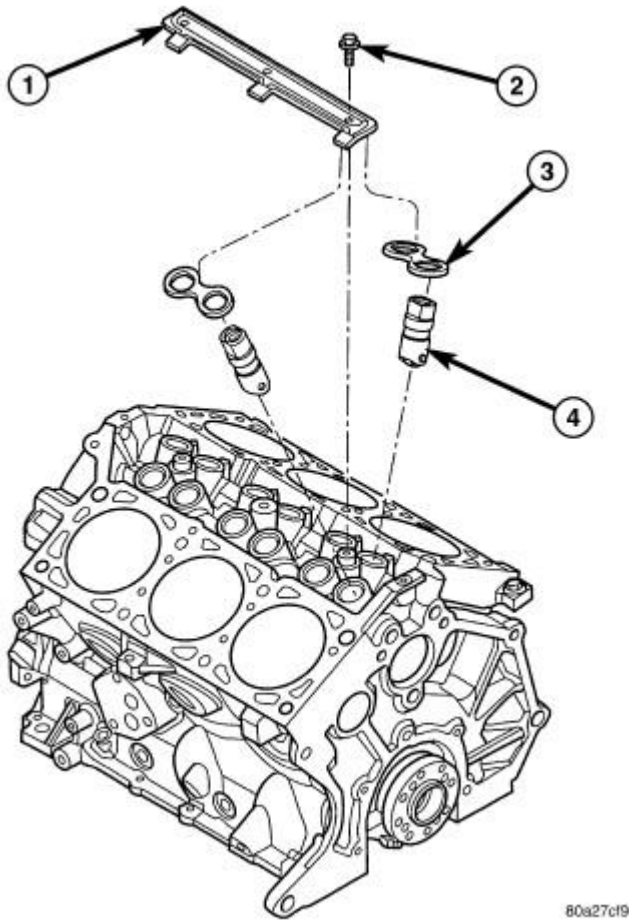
Yoke Retainer, Bolt, Aligning Yoke & Hydraulic Lifter
